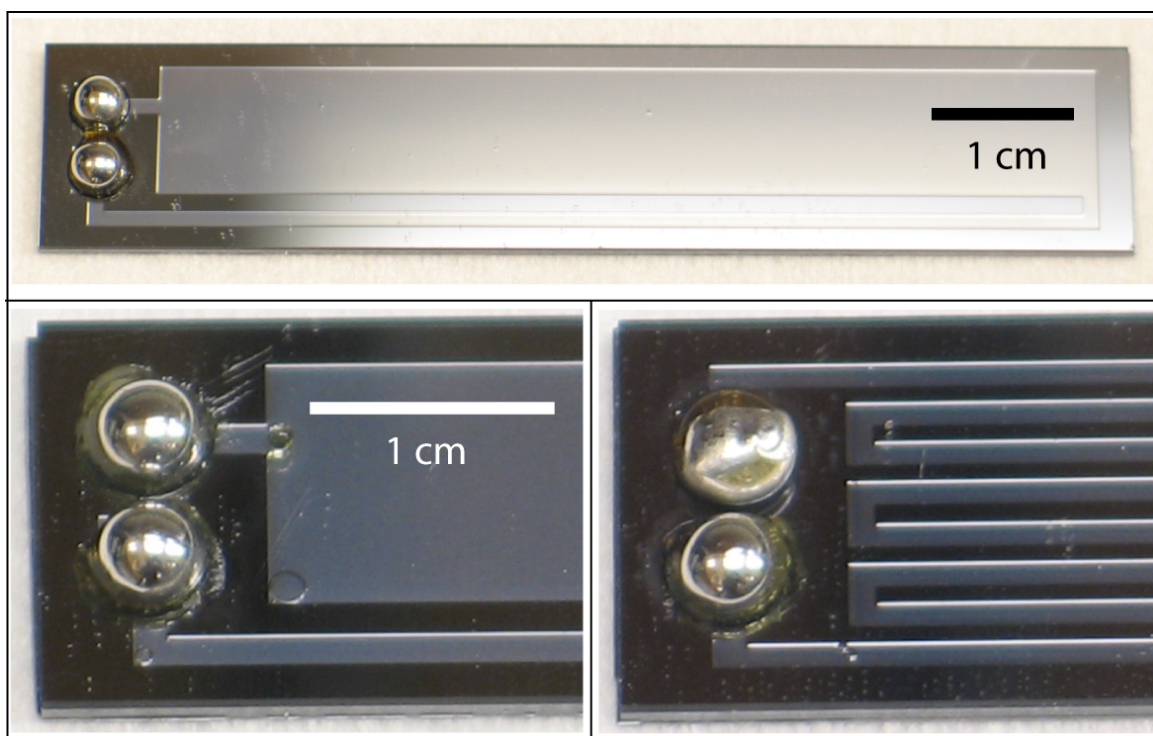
A solder-sealed device and two close-up views of solder-sealed fill ports.
